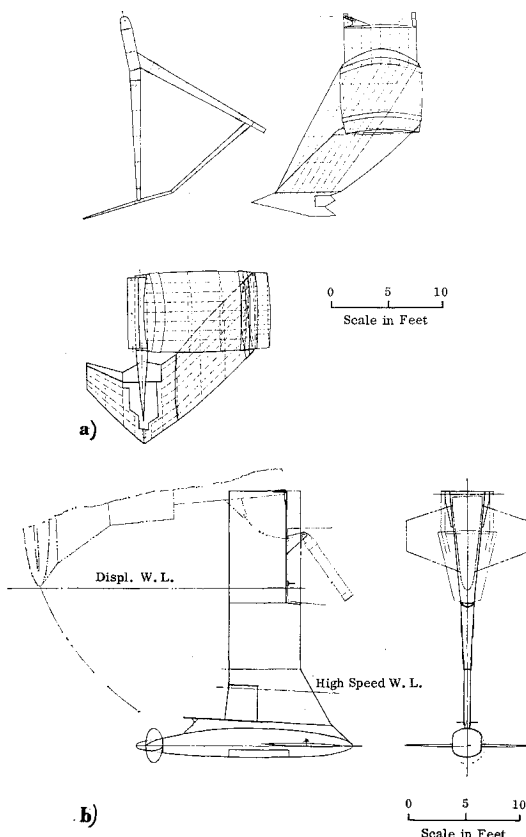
a) Forward foil and strut assembly; b) tail hydrofoil and strut assembly.
